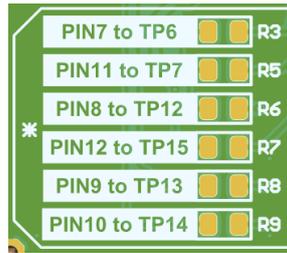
Jumper's Assignment to TPs of Socket Adapter Connector SV1
